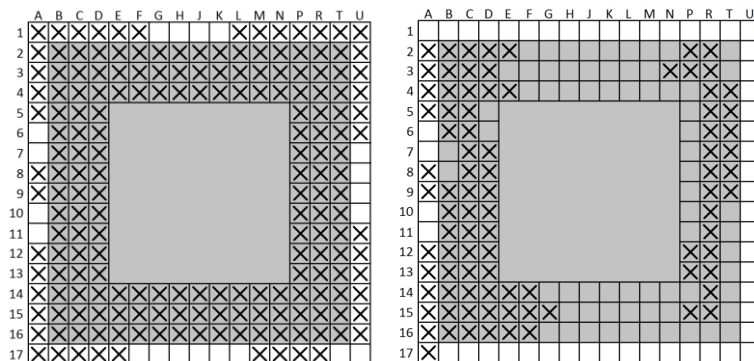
Location of failed solder joints to BGA208 with SnPb solder joints (left image) and SAC305 solder joints (right image). The components were mounted on test boards that were thermally cycled without prior aging. Solder joint pairs with increased resistance or open circuit are marked with x. The grey squares show the size of the chip in the component.
